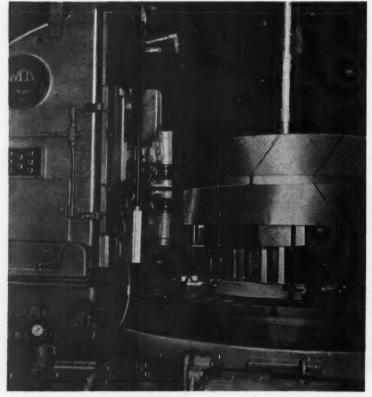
Michigan V-48 gear-shaving machine set up for finishing internal gears 48 inches in diameter with a face width of 30 inches
